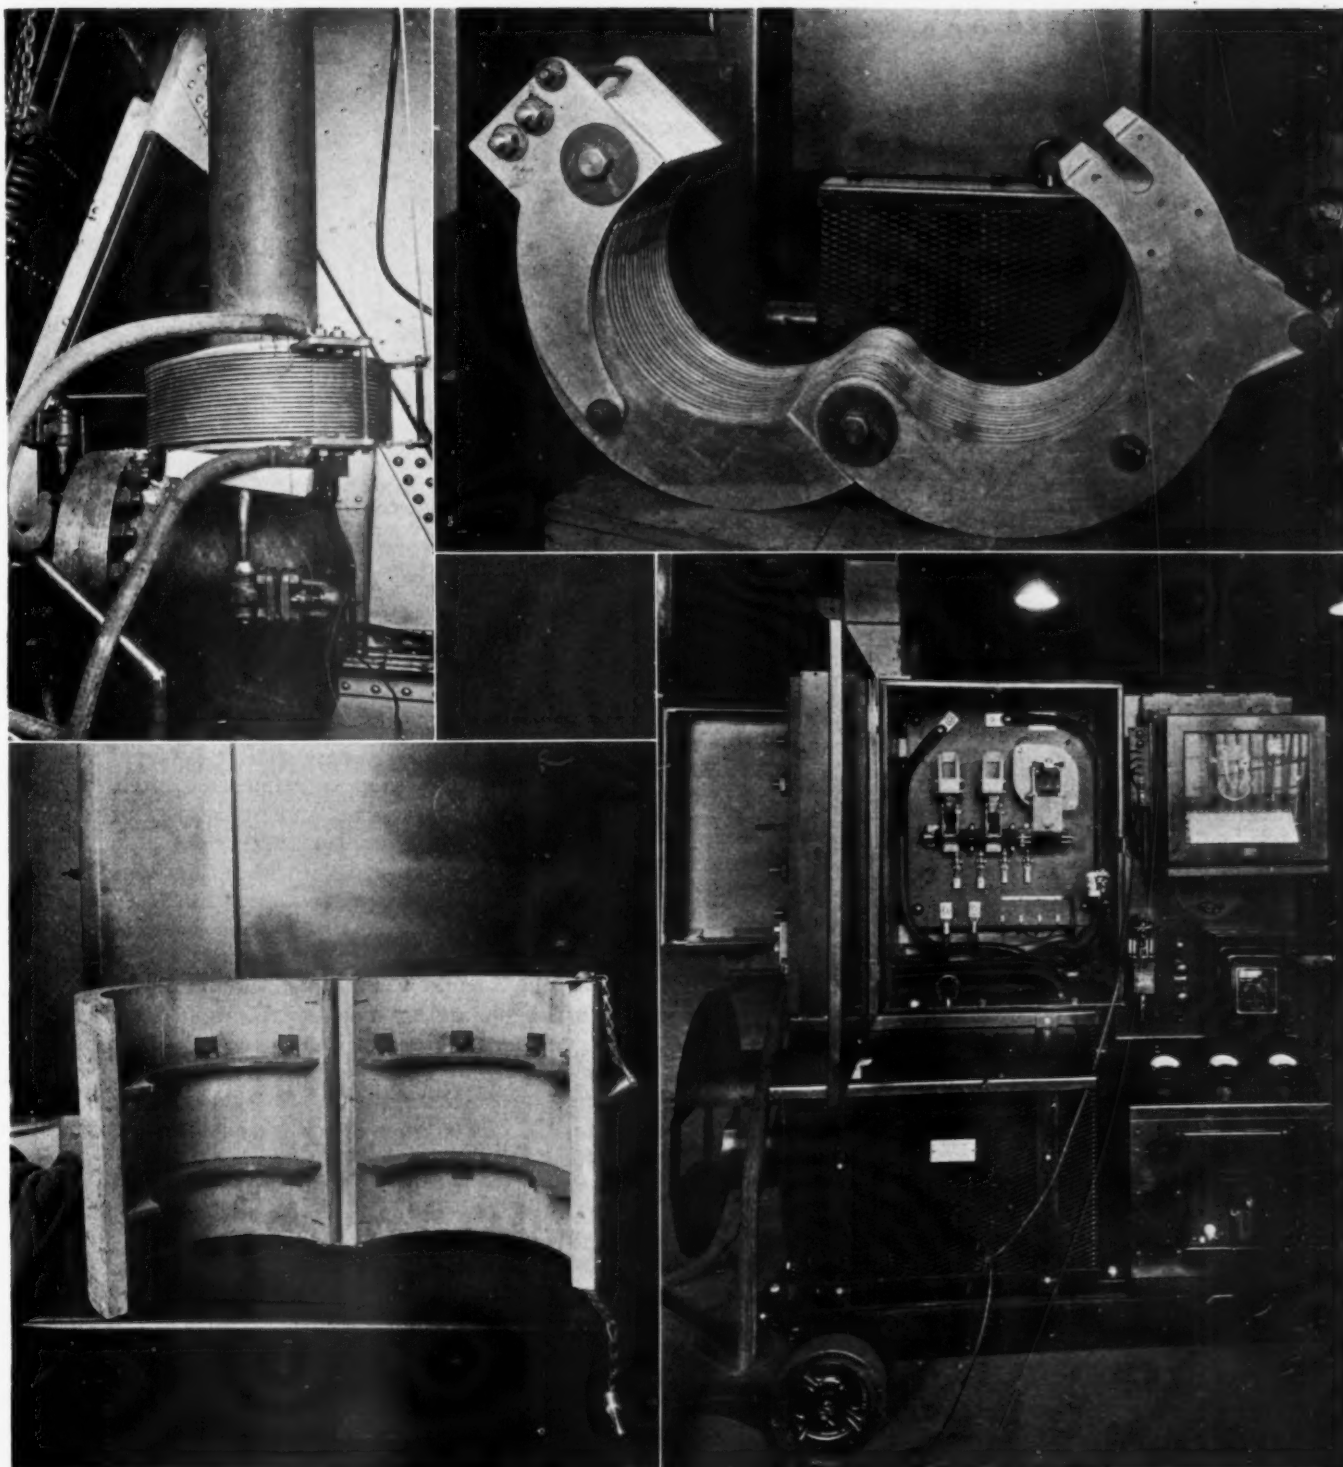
(upper right), Stress-relieving collar; (upper left), 10-in. main superheated steam line valve with stress-relieving collar on welded joint; (lower left), insulating sleeve; (lower right), transformer and control for stress relieving pipe welds
